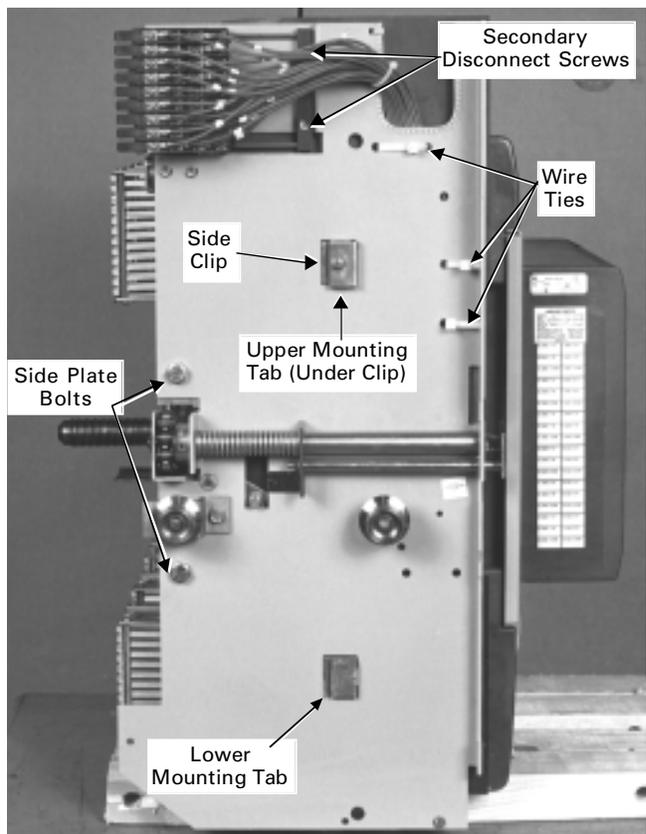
2500–4000 A draw-out breaker side panel, showing the wire ties, bolts, and clip to be removed.
